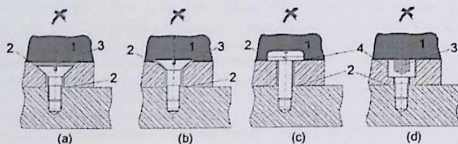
Screws may not be exposed to food product (1) because debris collects in the screw drive, because they give rise to metal-to-metal contact corrosion (2), and because they create gaps, dead areas (3) and crevices (4). Countersunk screws with slots or other drive configurations are not recommended for the reasons mentioned, and incorrect machining of the countersunk hole may cause the screw to either (a) form a pocket in which debris collects or (b) to protrude into the product flow giving rise to circumferential crevices where debris may become trapped. (c) Pan, dome, round and truss screws are not suitable because they protrude in the product flow. (d) Socket head cap screws are not allowed in the food area because debris accumulates in the recess or socket to fit an Allen wrench for turning. In addition, the use of counterbores is not recommended for all the reasons mentioned earlier (CFPRA, 1983; Leheveld et al., 2003; Hauser et al., 2004b).
